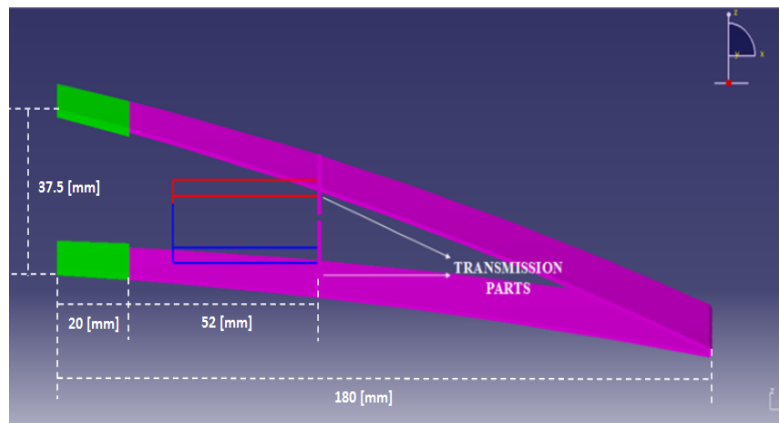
Transmission Parts of the Control Surface - The Servo Motors to Actuate the Upper Surface shown in Red; the Servo Motors to Actuate the Lower Surface shown in Blue
